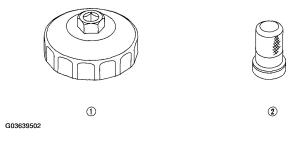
Identifying Special Tool Courtesy of AMERICAN HONDA MOTOR CO., INC.
